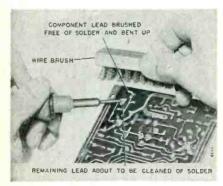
Removal of component mounted in such a manner that its leads cannot be cut to free it from the board.
